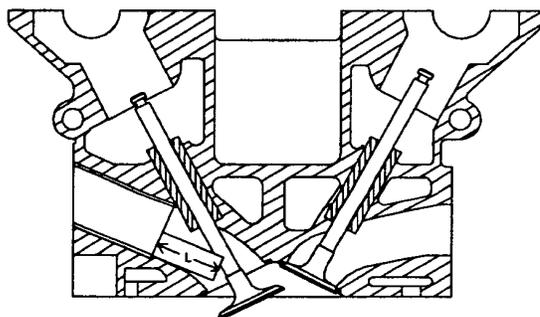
Four-valve cylinder head with pent roof chamber - Section A-A, showing tubes of length L
